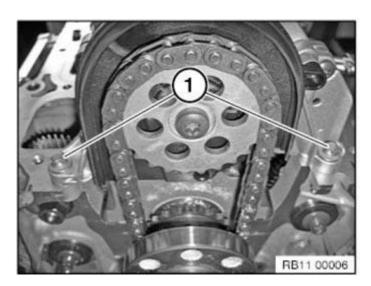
Identifying Gear Case Cover Screws Courtesy of BMW OF NORTH AMERICA, INC.
